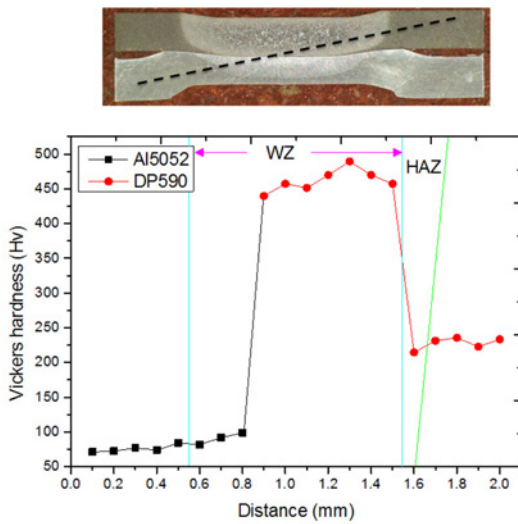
Hardness distribution on welding zone of IRW in weld current 11.5 kA
